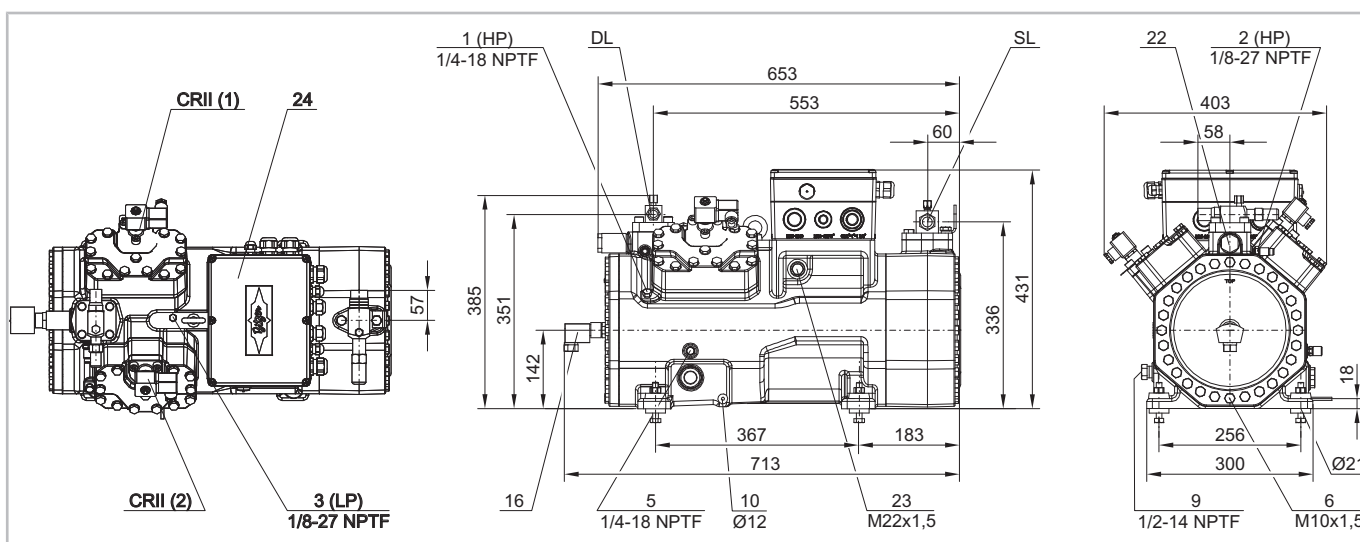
Dimensional drawing 4FTEU-30LK .. 4CTEU-30LK
